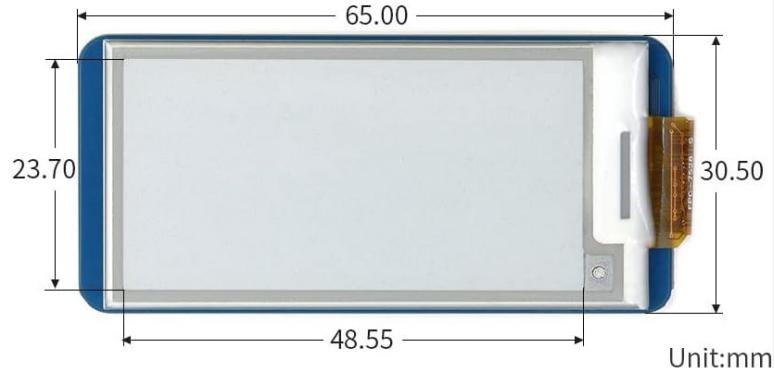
Outline dimensions of the 2.13-inch E-Paper module in millimeters.
